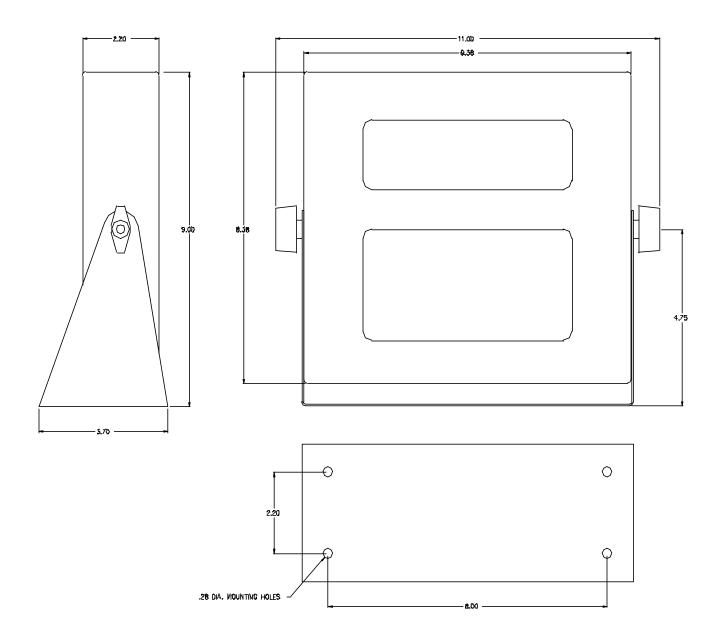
Model 455 indicator mounting holes and overall dimensions
